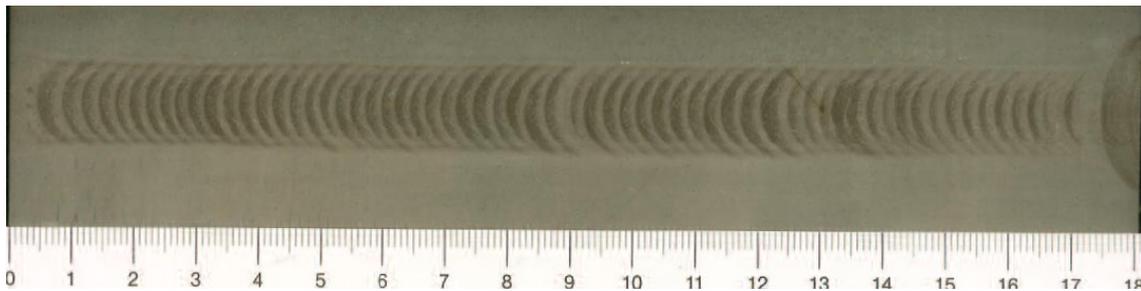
Cross section of HW-NG-GTAW weld produced in 180 mm P91 steel.
